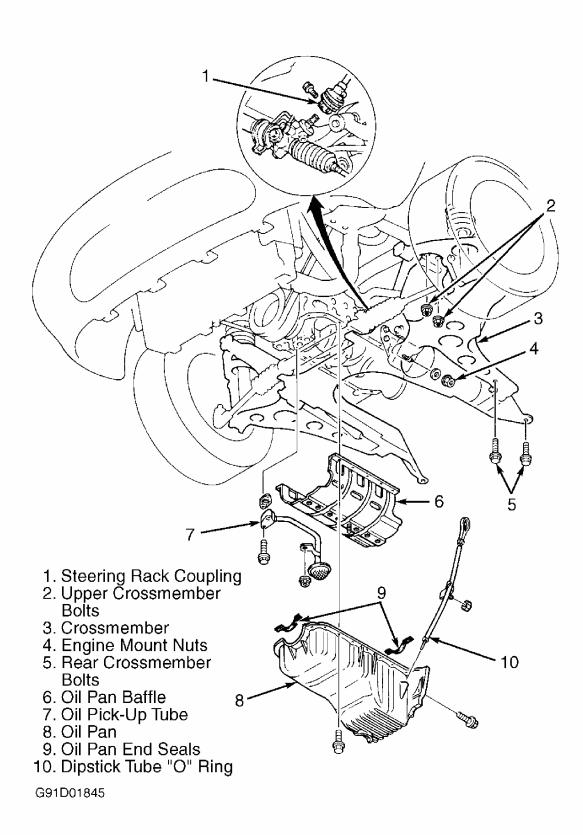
Removing Crossmember & Oil Pan (Miata) Courtesy of MAZDA MOTORS CORP.
